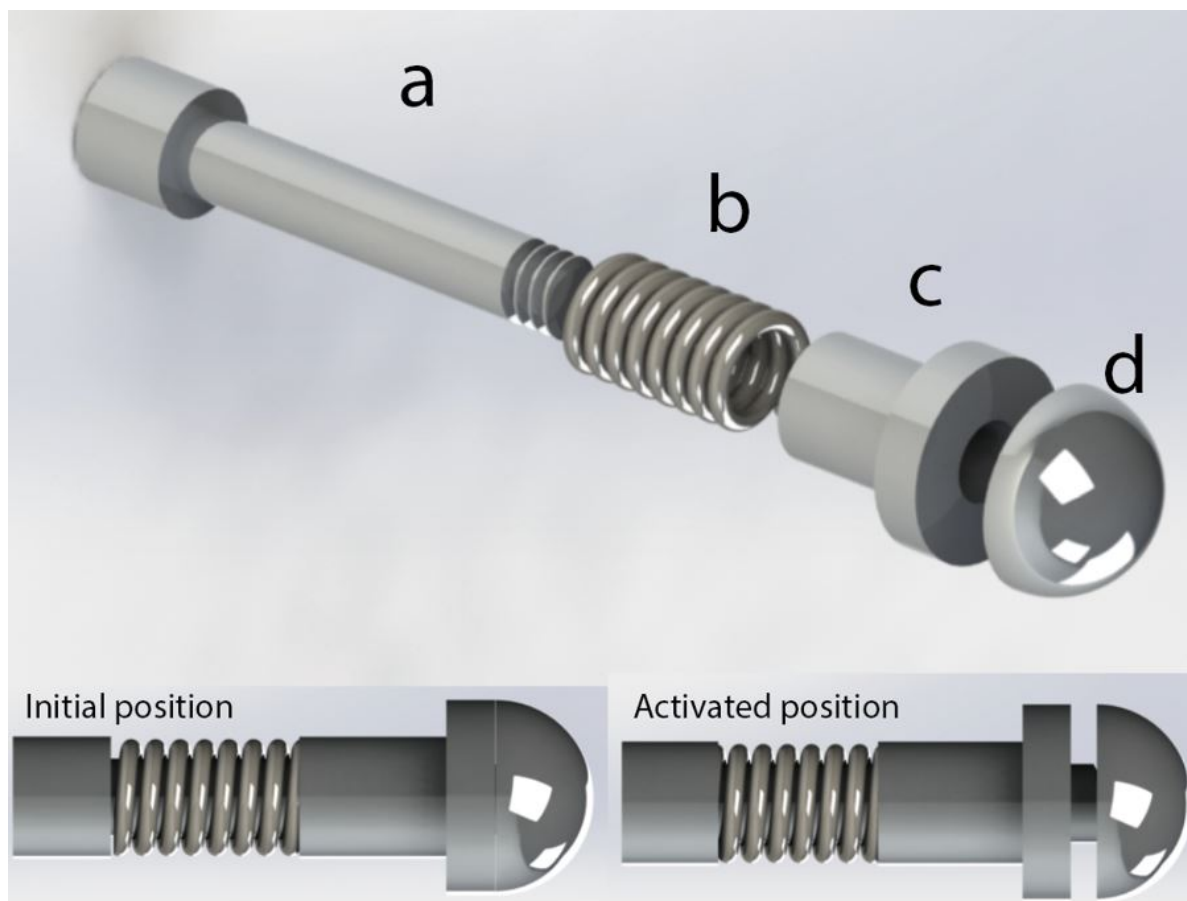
Exploded view (top) of the working head, with the initial position (bottom left) and activated position (bottom right). The proximal side is to the right of the mechanism, the distal end to the left of the mechanism, with a) The piston, which will receive the hydraulic pressure wave at the proximal end, b) the compression spring, c) the stop, which will withhold the working head from shooting out of the tube, and d) the tip, which will strike the target tissue.
